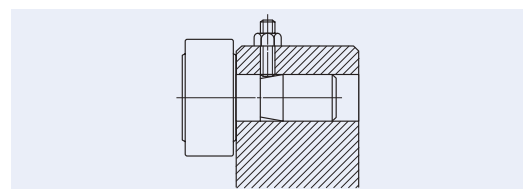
Mounting example of Easy Mounting Type Cam Follower
